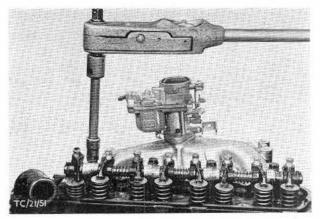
Torque rocker shaft bolts as specified in Technical Data.
